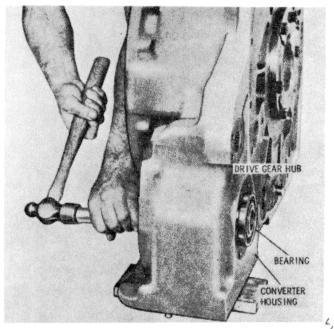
Removing Oil Pump Drive Gear Hub and Bearing
